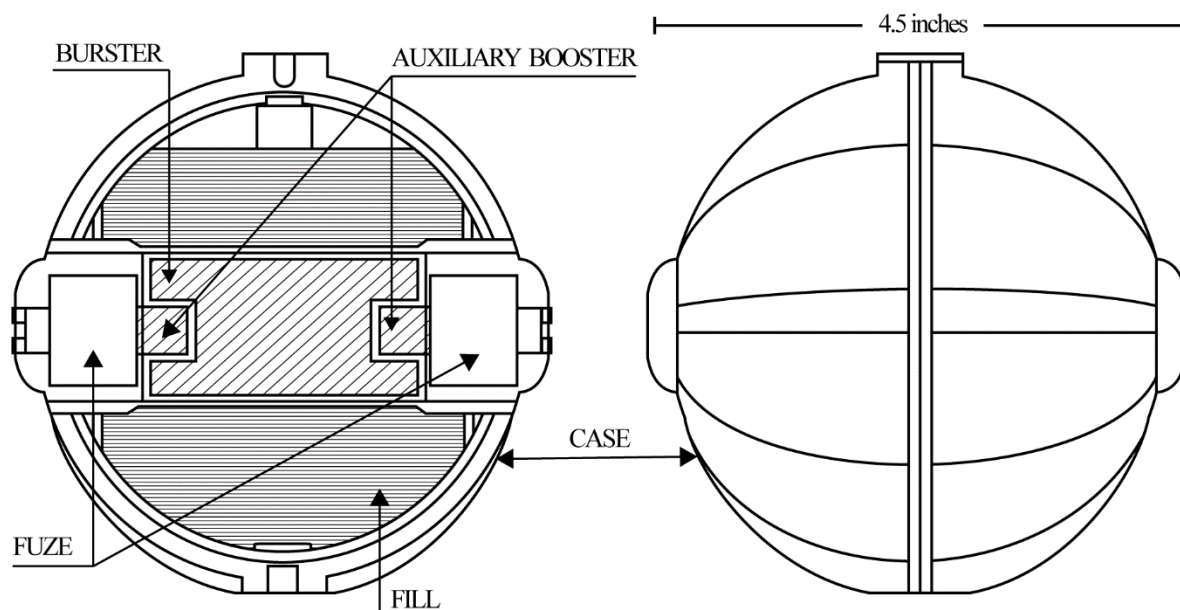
Bomblet, 3.4-pound, Spherical, M134 (E130R1) - Line Drawing
